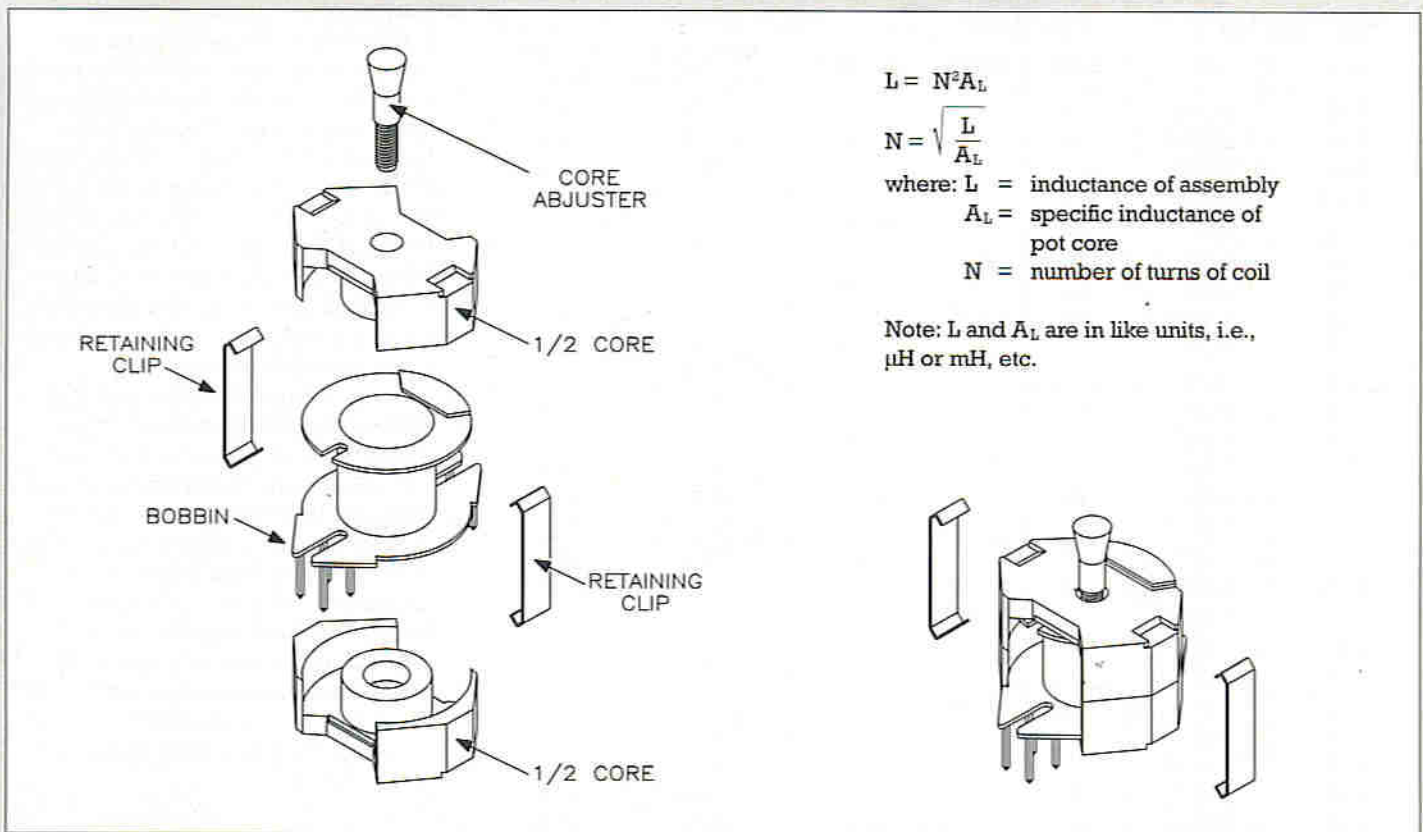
Exploded view of pot core assembly, together with basic design formulae.
